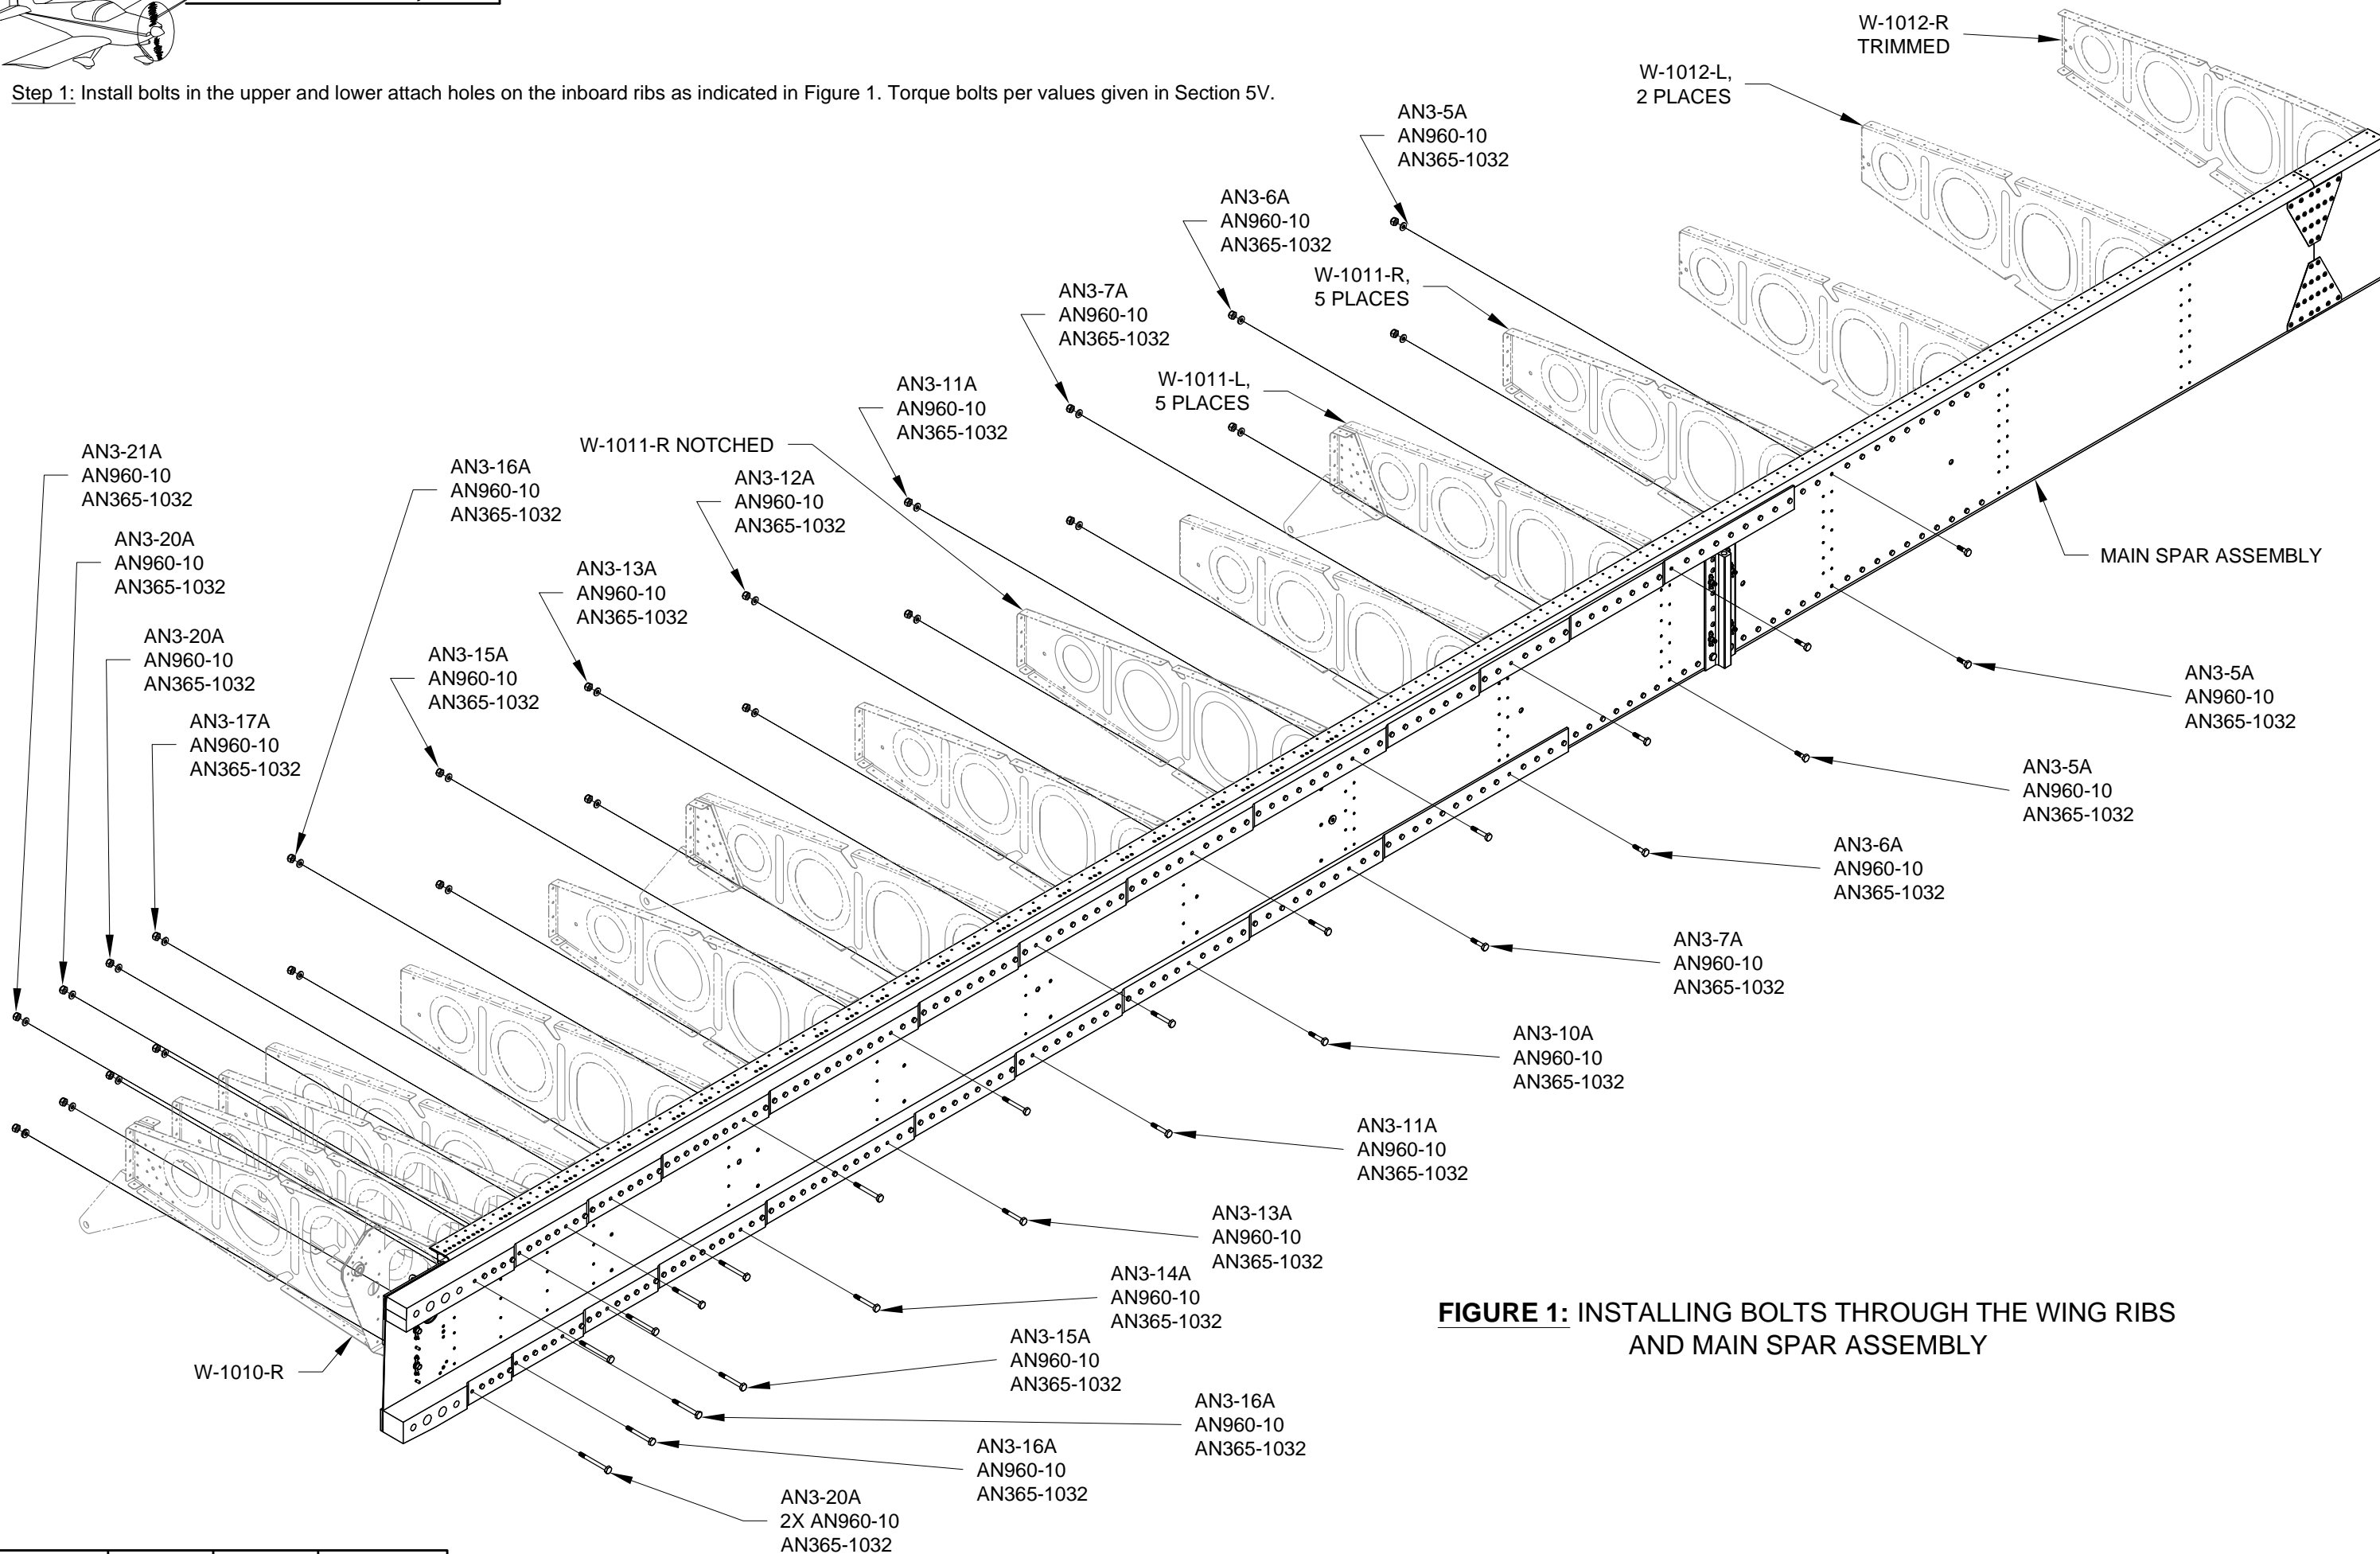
INSTALLING BOLTS THROUGH THE WING RIBS AND MAIN SPAR ASSEMBLY
